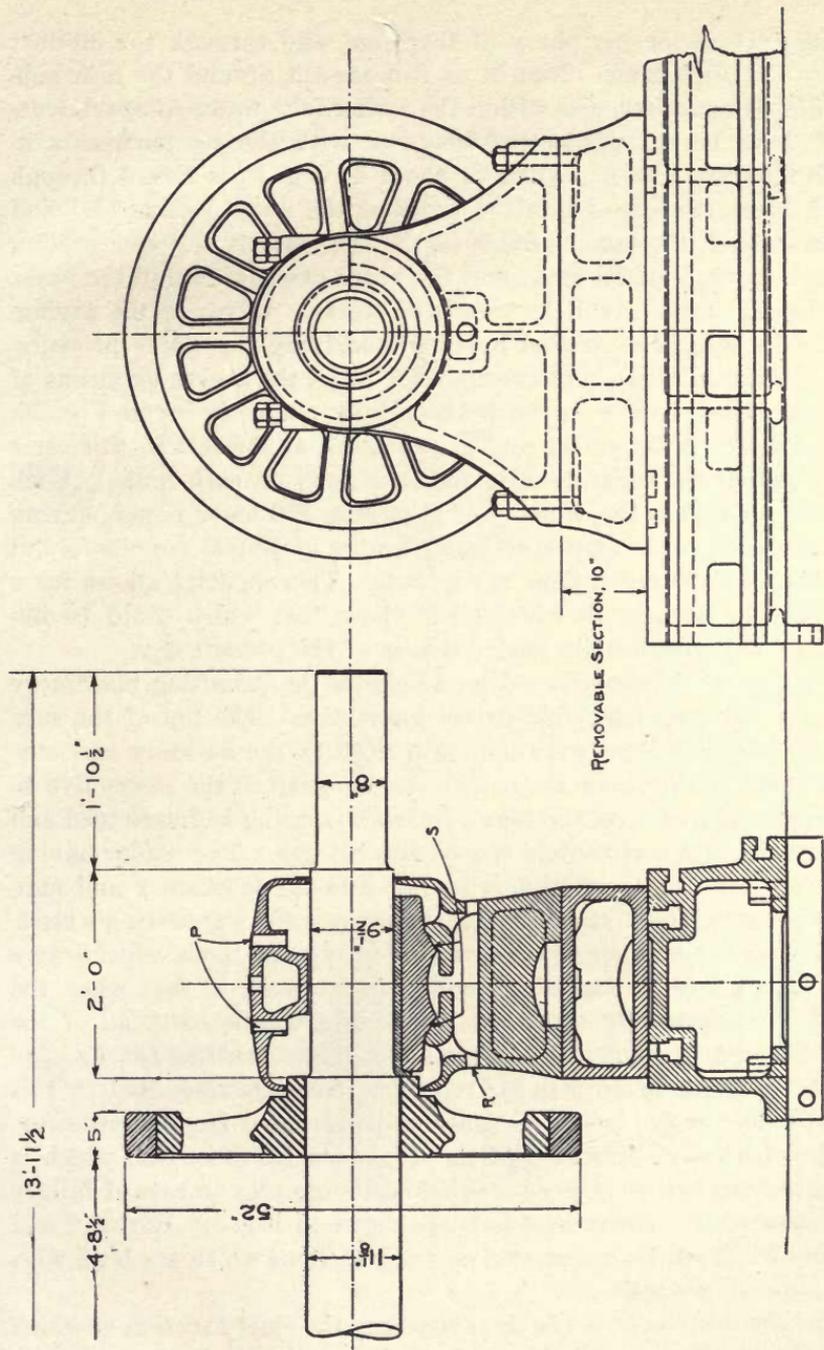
ONE OF THE SUPPORTING WHEELS, WITH ITS AXLE, BEARING, PEDESTAL, AND BED PLATE.
